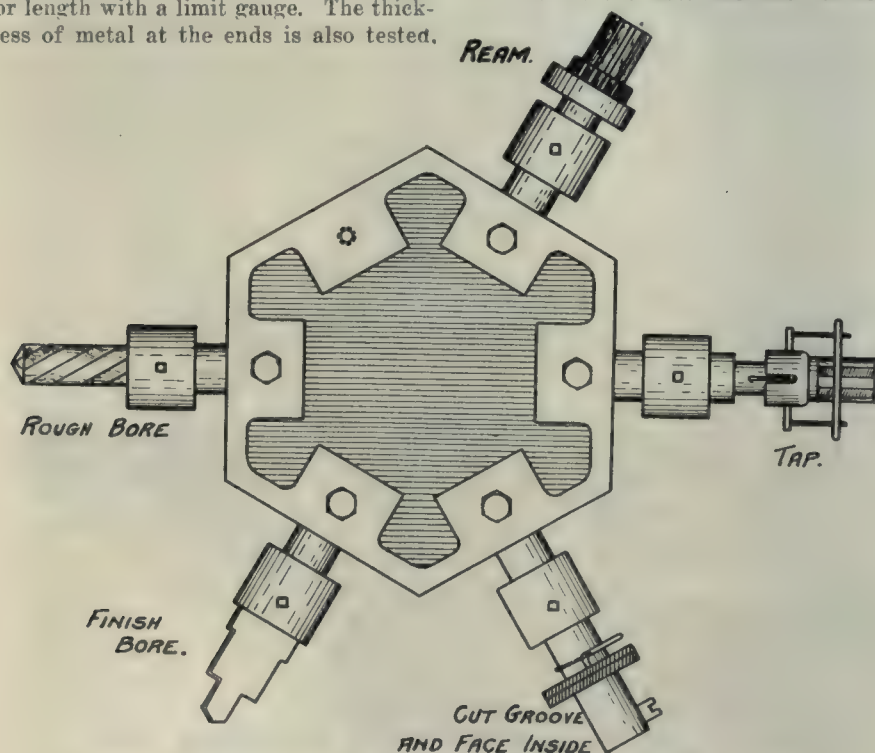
TOOLS CARRIED ON THE WARNER & SWASEY TURRET.
